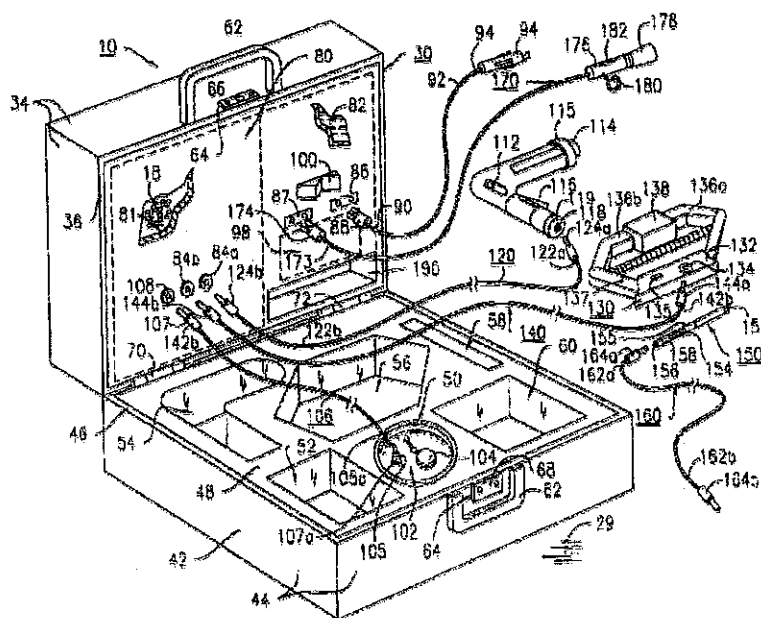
An exploded front perspective view of the tire changing kit of the present invention
